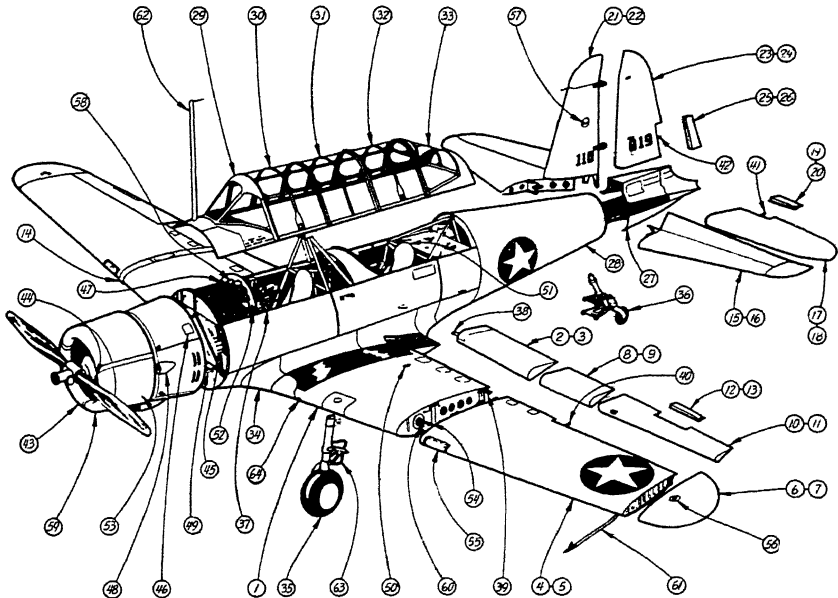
1.—Installation and assembly index drawing for illustrated parts catalogue.
